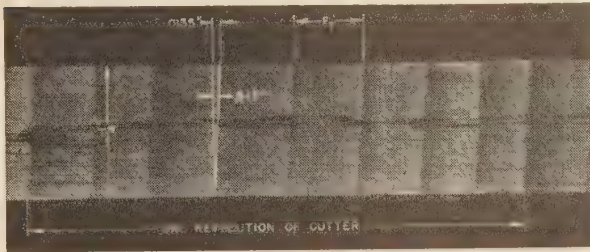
TOOTH MARKS ON A MILLED SURFACE
